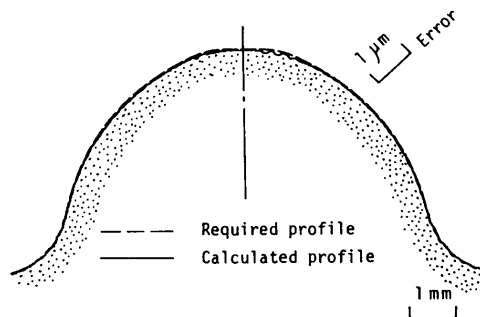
Cutting-edge profile of pinion cutter finished by grinding wheel with calculated profile
